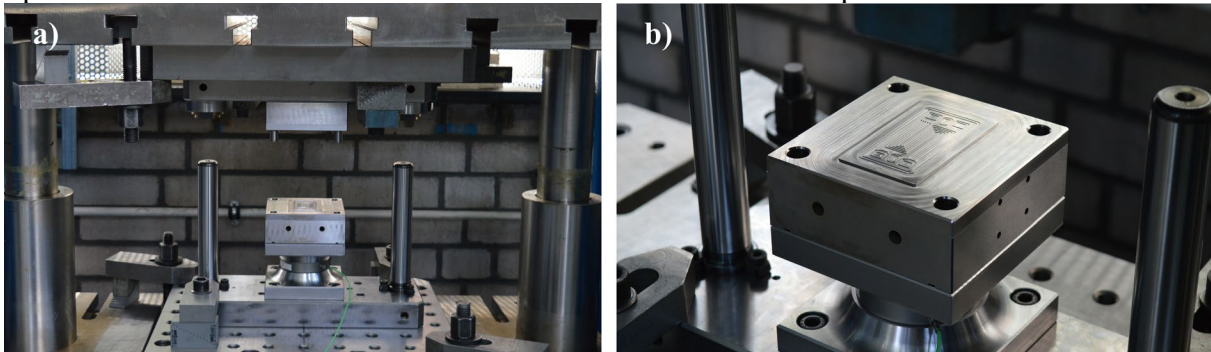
(a) Laboratory tool in the press and (b) detailed view of the active tool surface of lower die.
